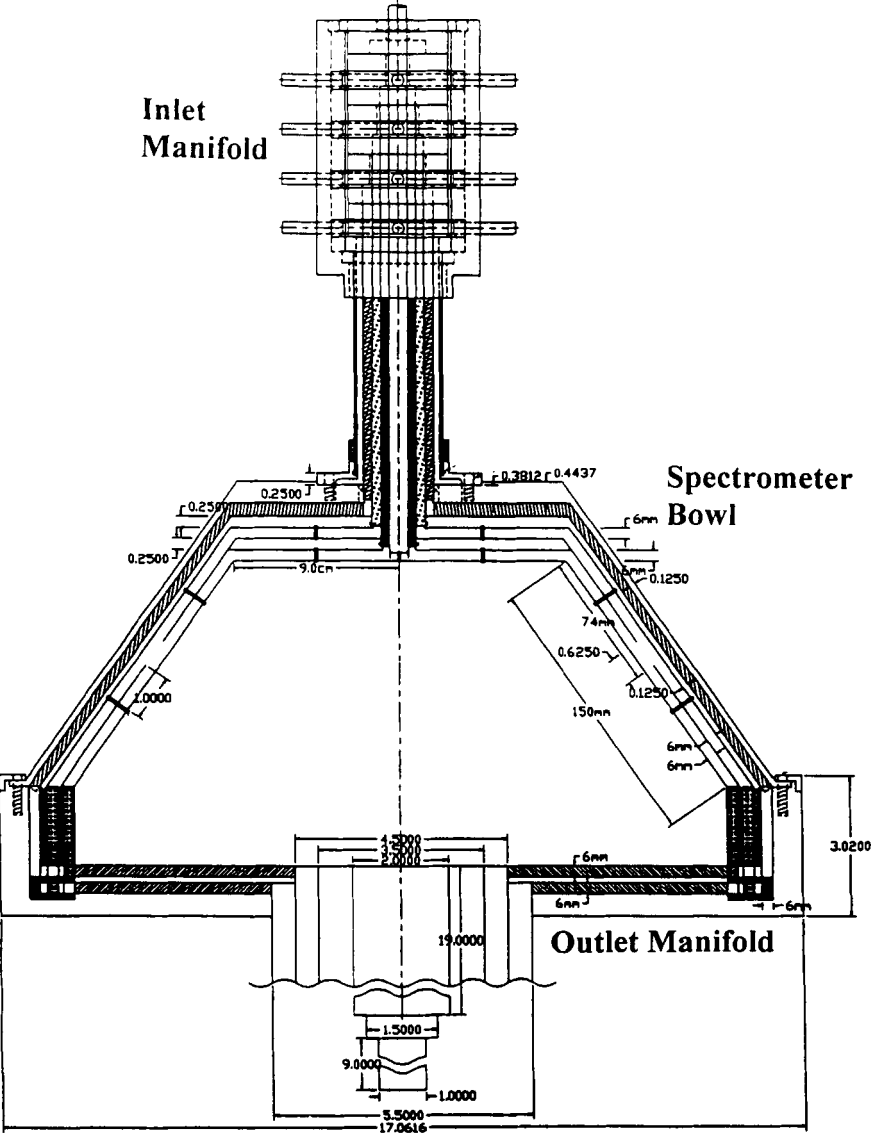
Drawing of the main components: inlet and outlet manifolds, and spectrometer bowl.
